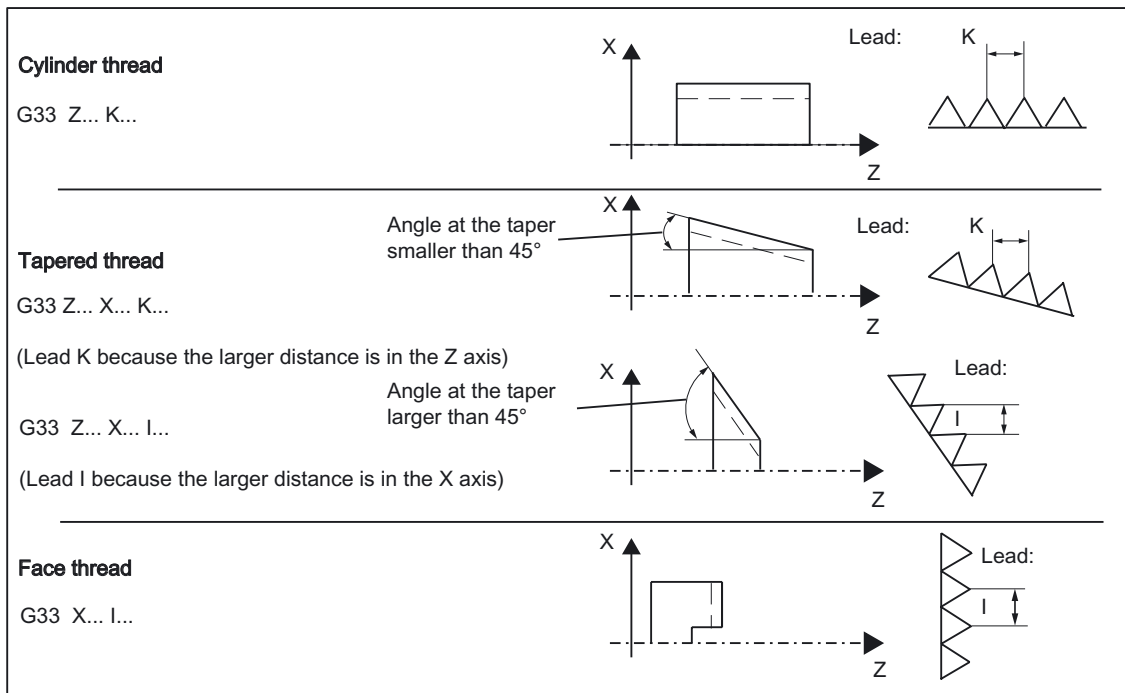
Lead assignment for cylindrical, tapered and transversal thread
